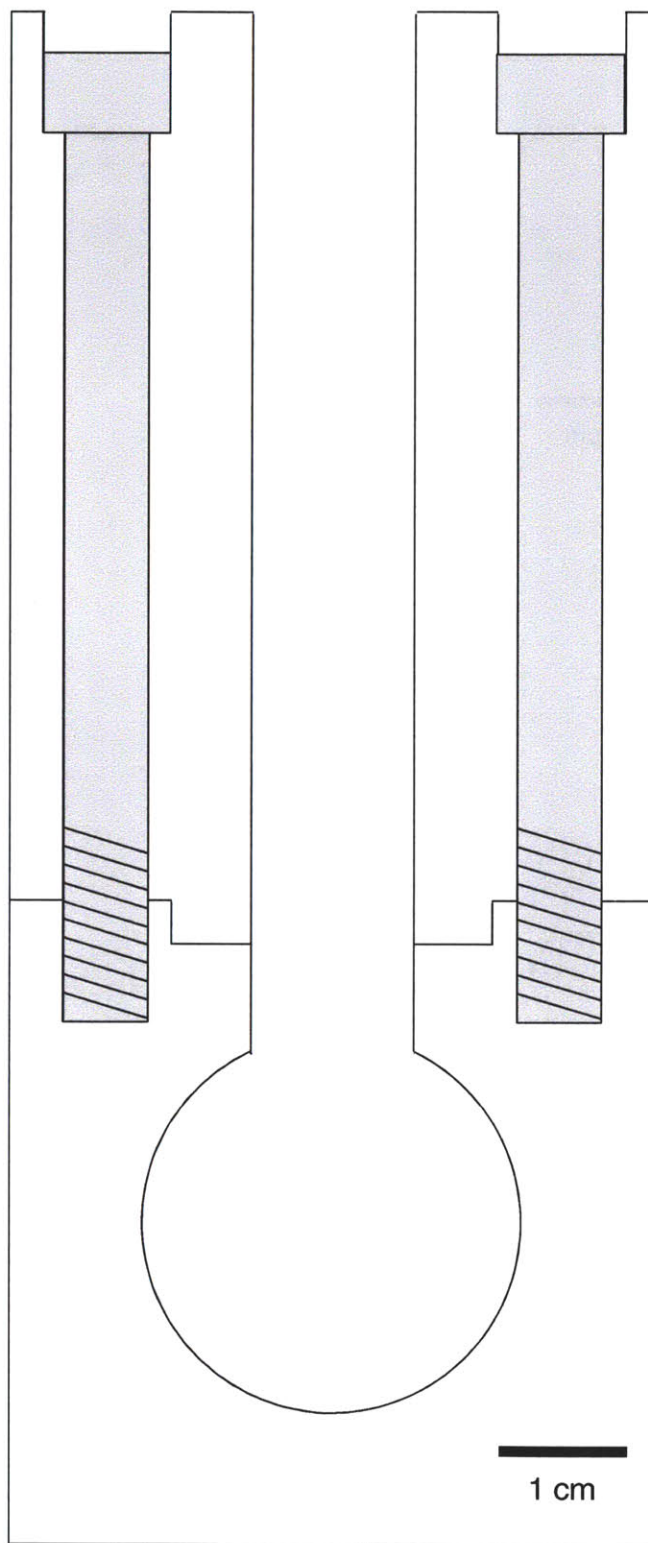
Front/back cutaway view of diaphragm cell showing the bolts used to attach the top piece which supports the conductivity electrode.
